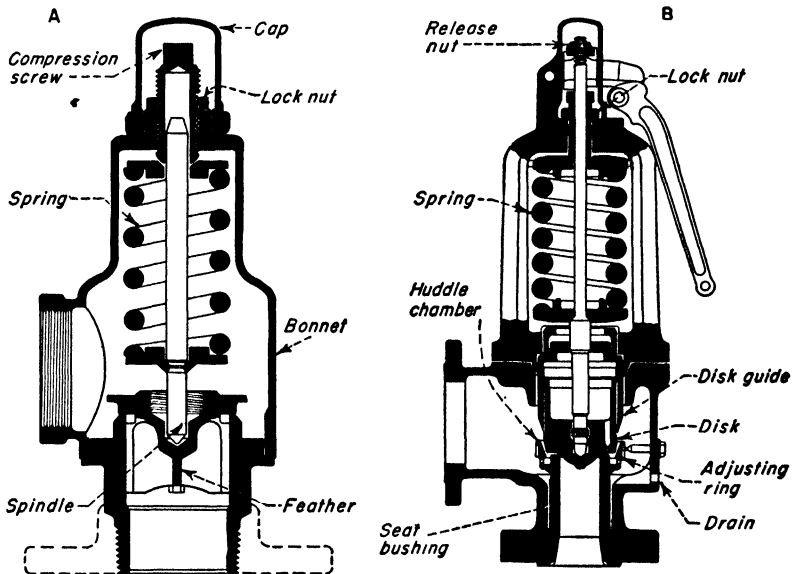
(A) Relief valves (used on liquids) close almost exactly at opening pressure. (B) Pop valves (used on vapor, gas) lower the pressure noticeably. (Courtesy of Power.)
